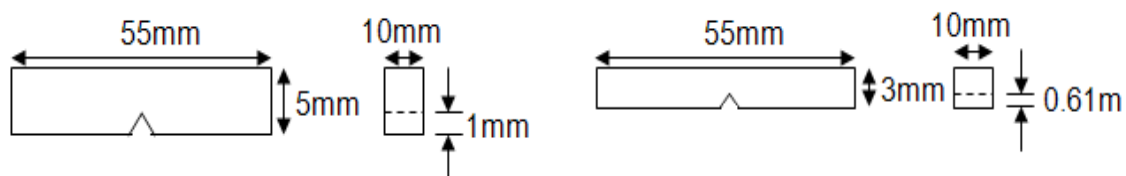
Sub-Size Specimen Dimensions for Charpy Test [42].
